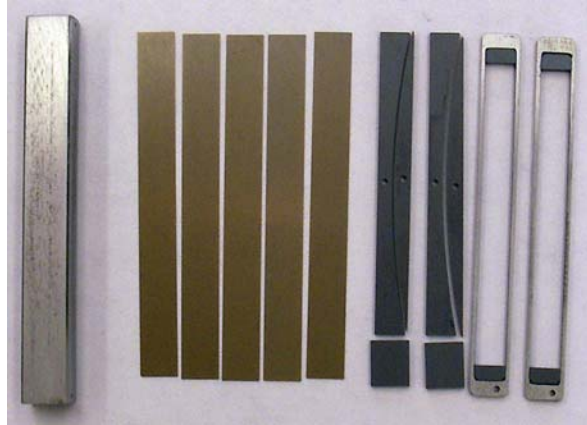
Components for the BSR assembly and the capsule internals. From left to right, coffin, CVD SiC lining/separating sheets, pre-strained BSR fixtures (and spacers), and dynamic self-loading fixtures.
